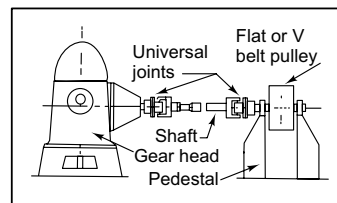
Shaft drive using universal joints to link right-angle gear head unit to engine shaft or belt pulley
